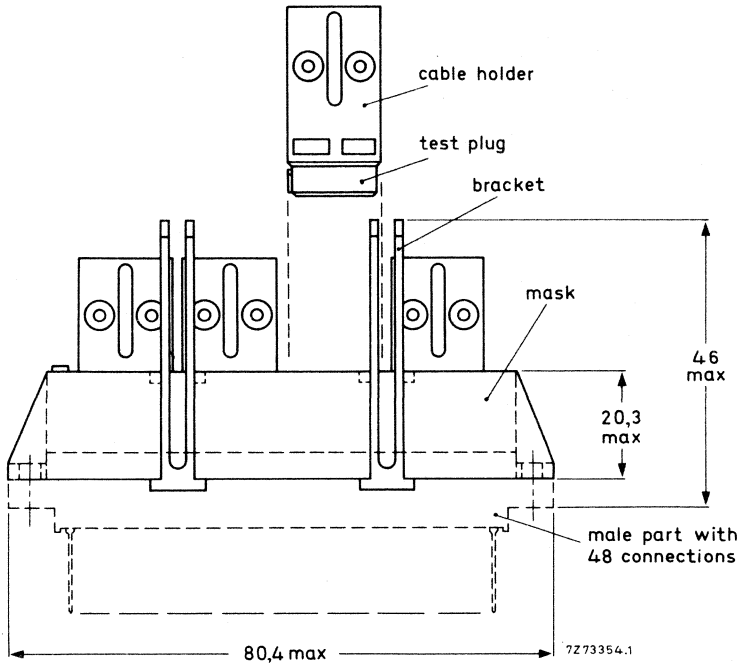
Four test plugs with auxiliary parts; dimensions in mm.
